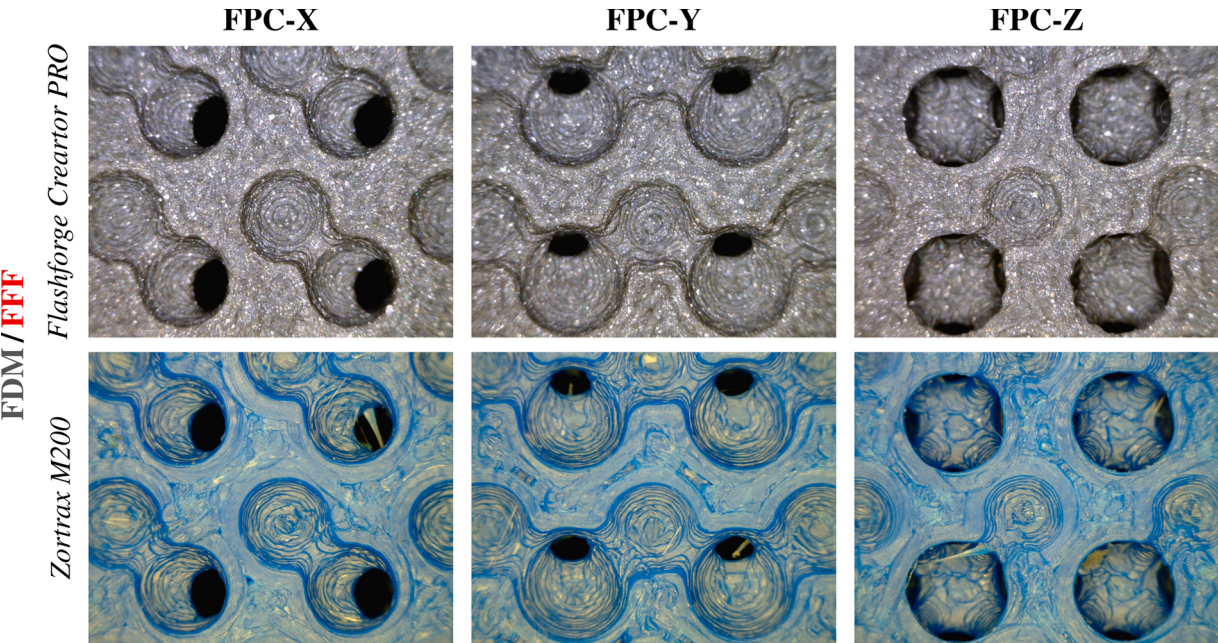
Zoomed surfaces of FPC samples manufactured by IPPT using two different devices in the same technology.
